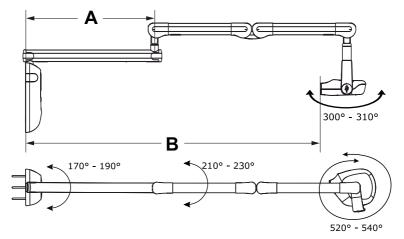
Wall Mounted Hatch X-Ray Fully Extended Right Side and Top Views
